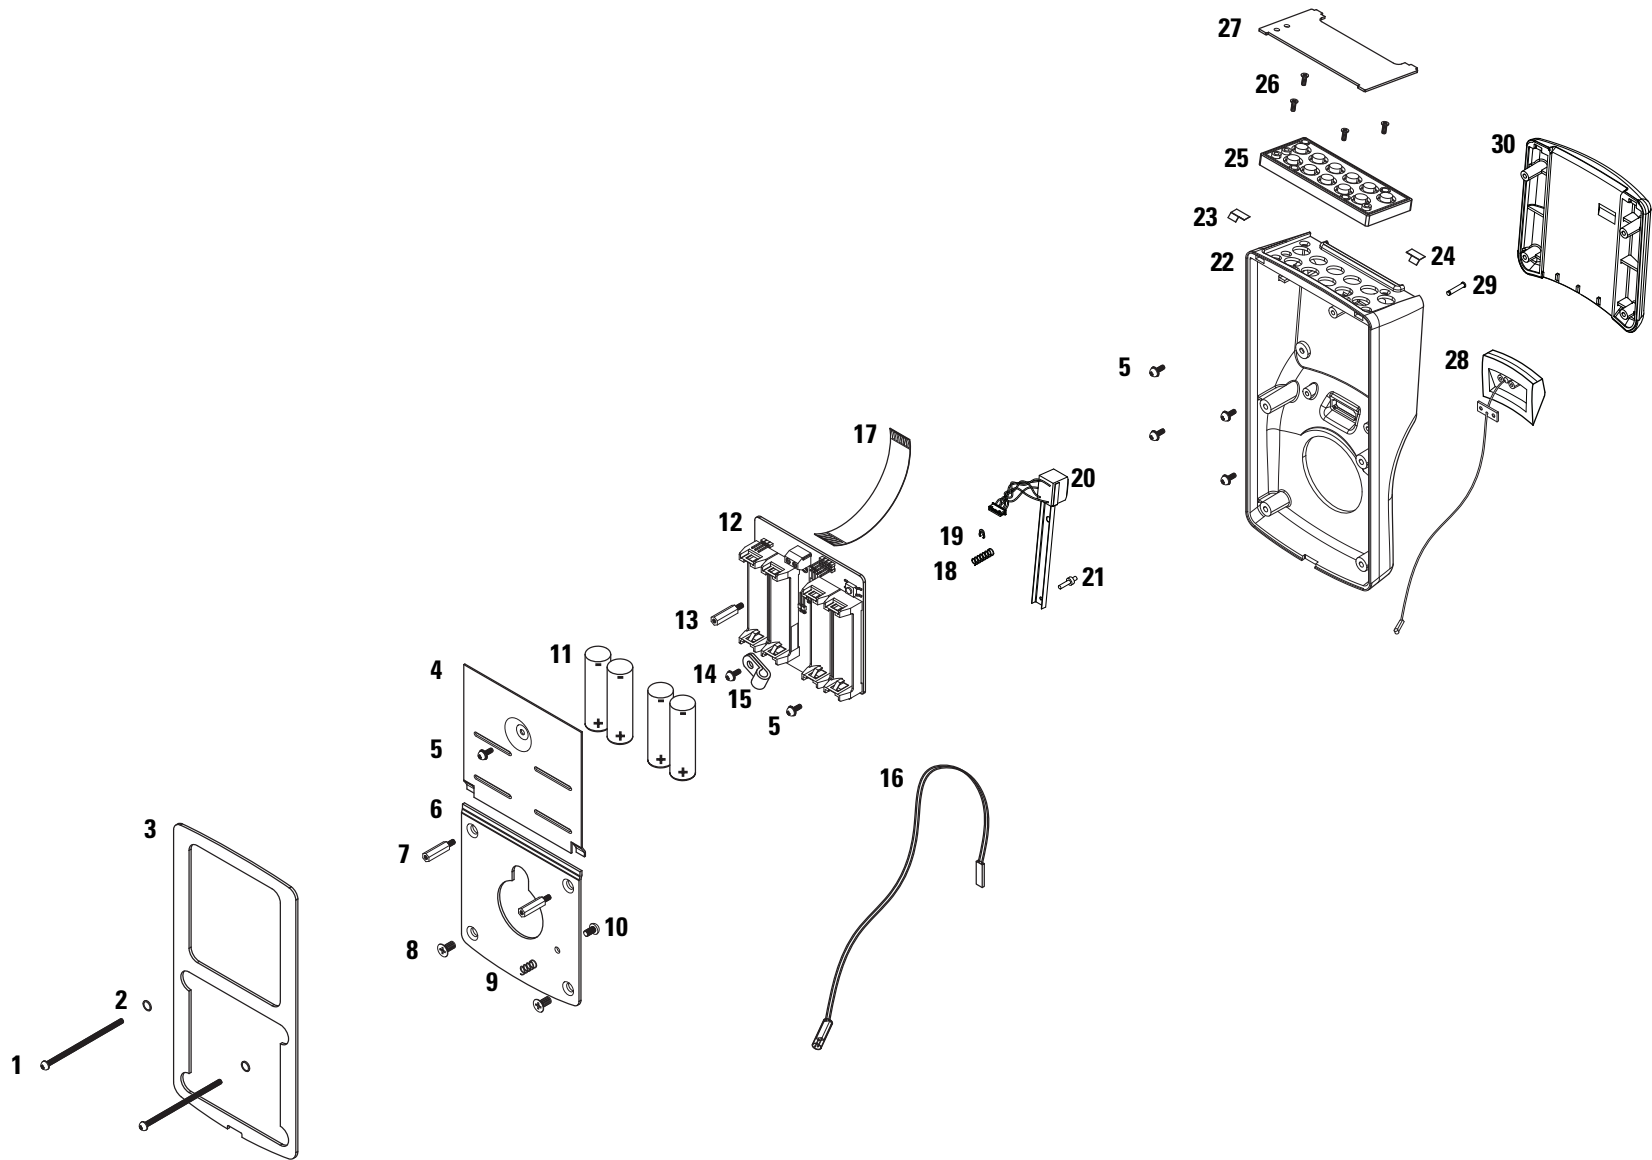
Magnetic stripe reader escutcheon assembly (WAMS mortise shown)
